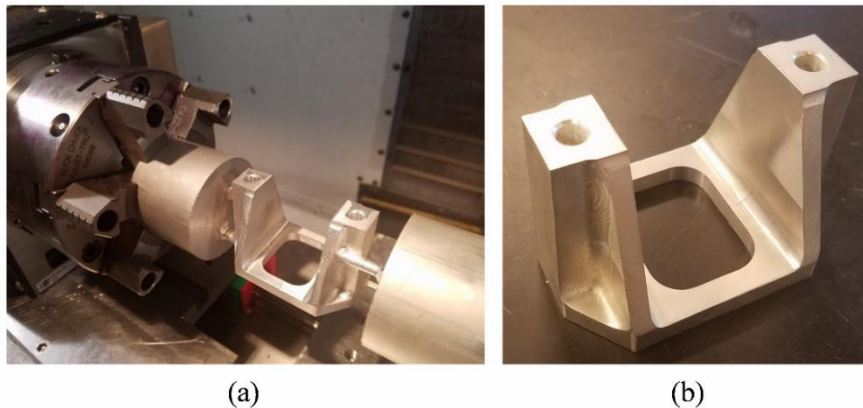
An example of an industrial bracket machined by a 4-axis CNC machine where the axis of rotation is chosen as the part's Y-axis. (a) the bracket with supports on after CNC-RP machining, (b) The finished bracket with all supports removed
